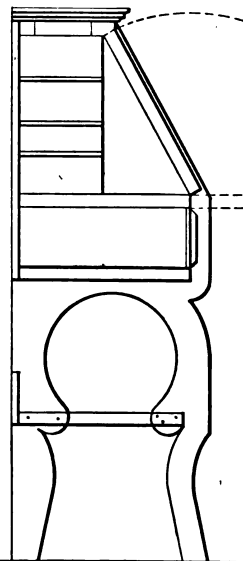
Vertical Section.—Scale, 1 Inch to the Foot.
